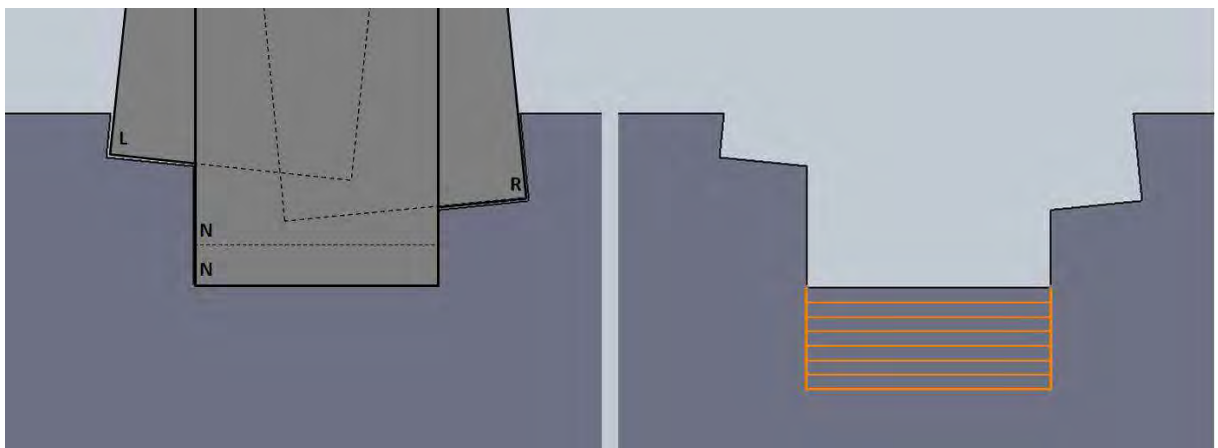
CAD drawing of tool paths for un-bevelled (U0°) tooth
